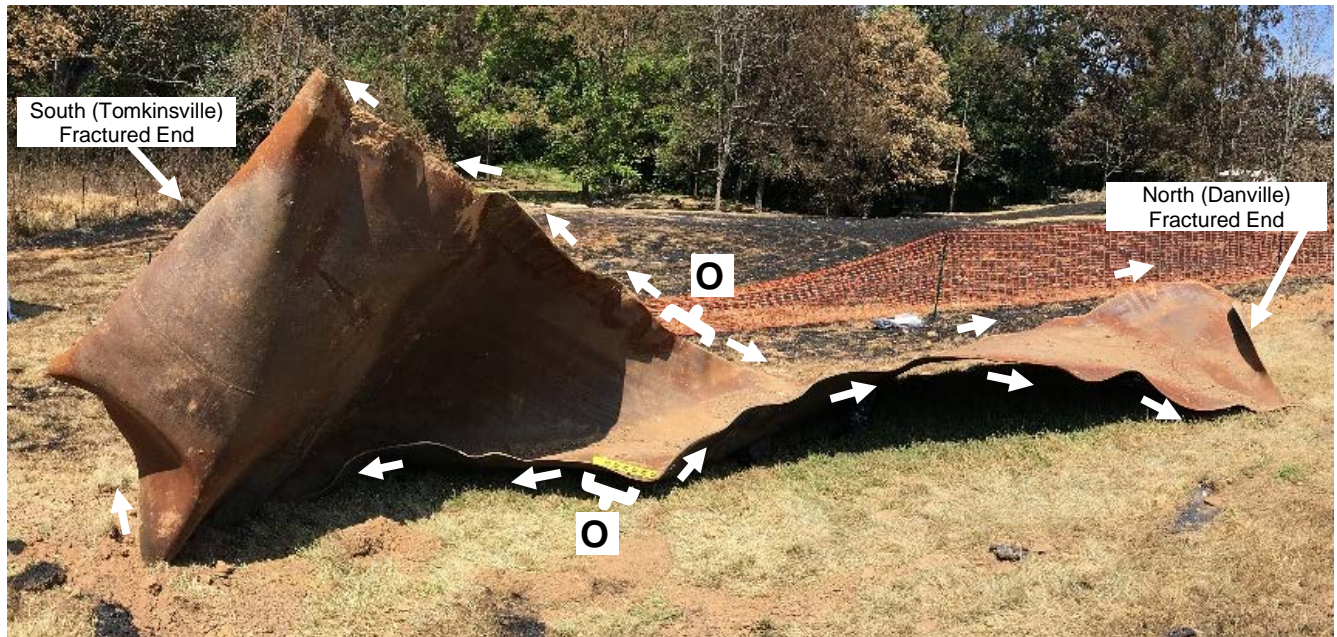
Photographs of the ejected segment of pipe that was found 481 feet from the crater showing the inner surface. The origin of the fracture is located in the area indicated by brackets "O" (mating fractures), and the general direction of fracture propagation is indicated by white unmarked arrows. The origin of the fracture is located approximately at the 4 o'clock position looking north.
